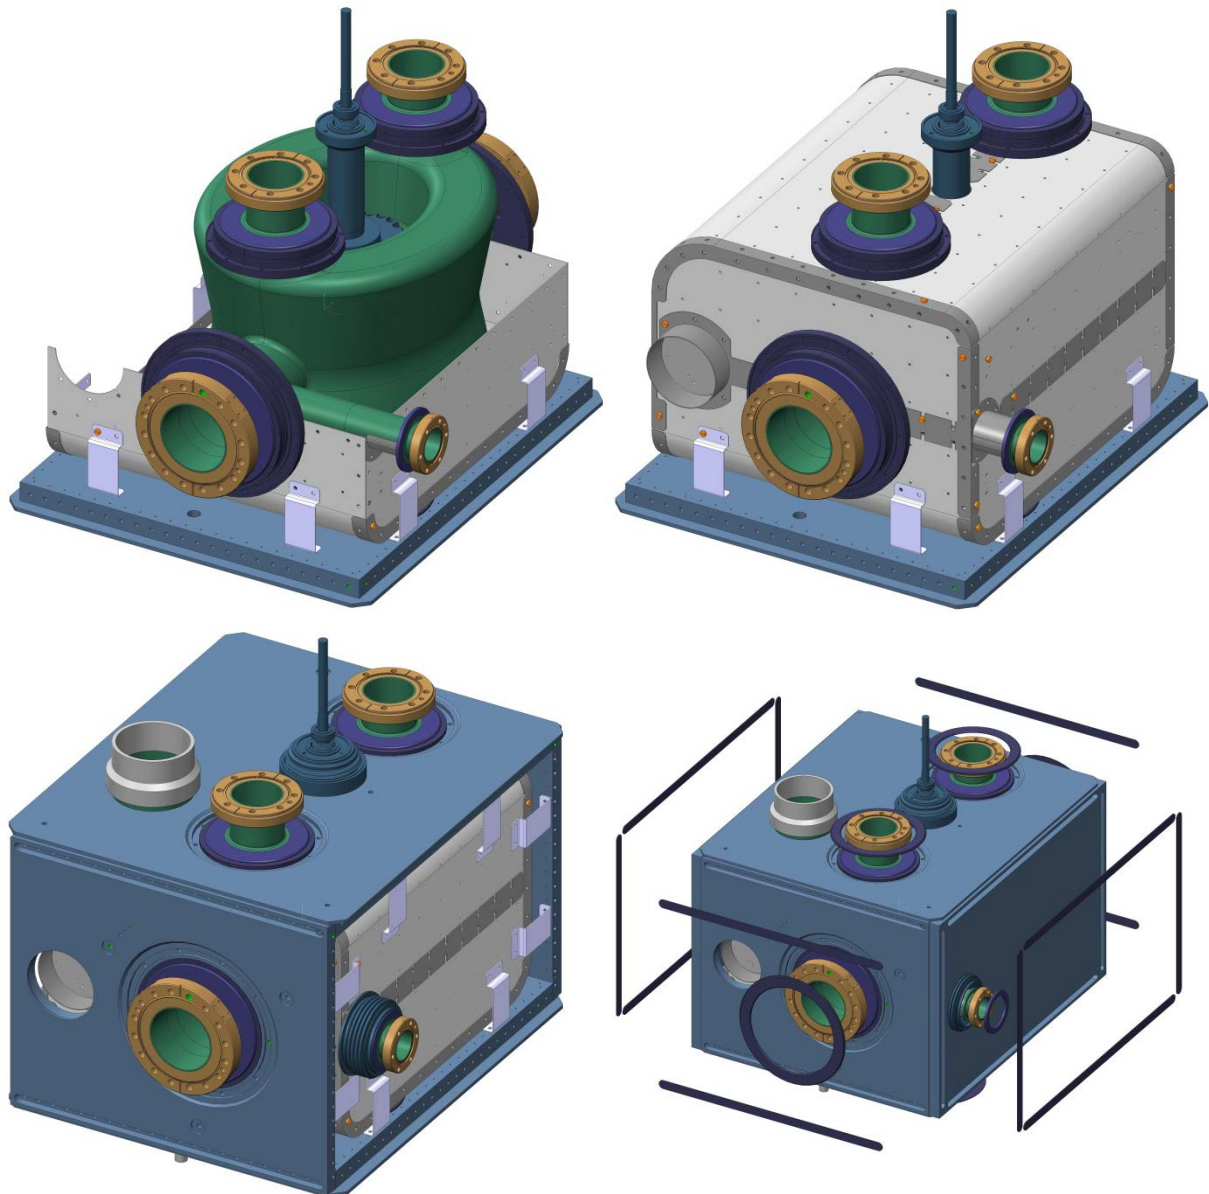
Some stages during the assembly of cold magnetic shield inside the helium vessel
